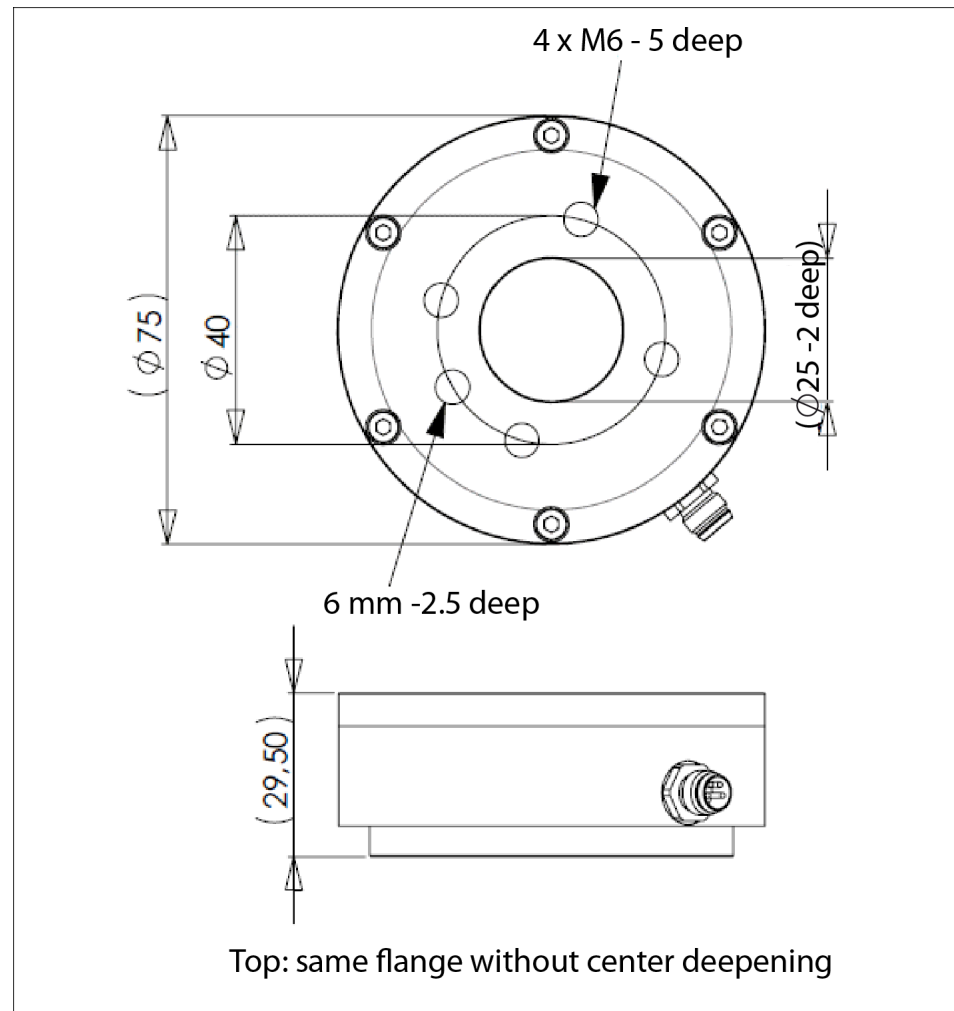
Flange drawings, top view (Fig. top) and side view (Fig. below, upside down)
